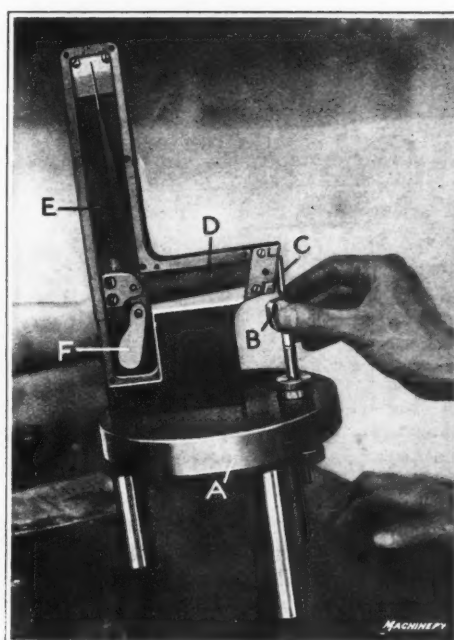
Indicating Gage shown in Fig. 60 with Plate removed to show Constructional Features
